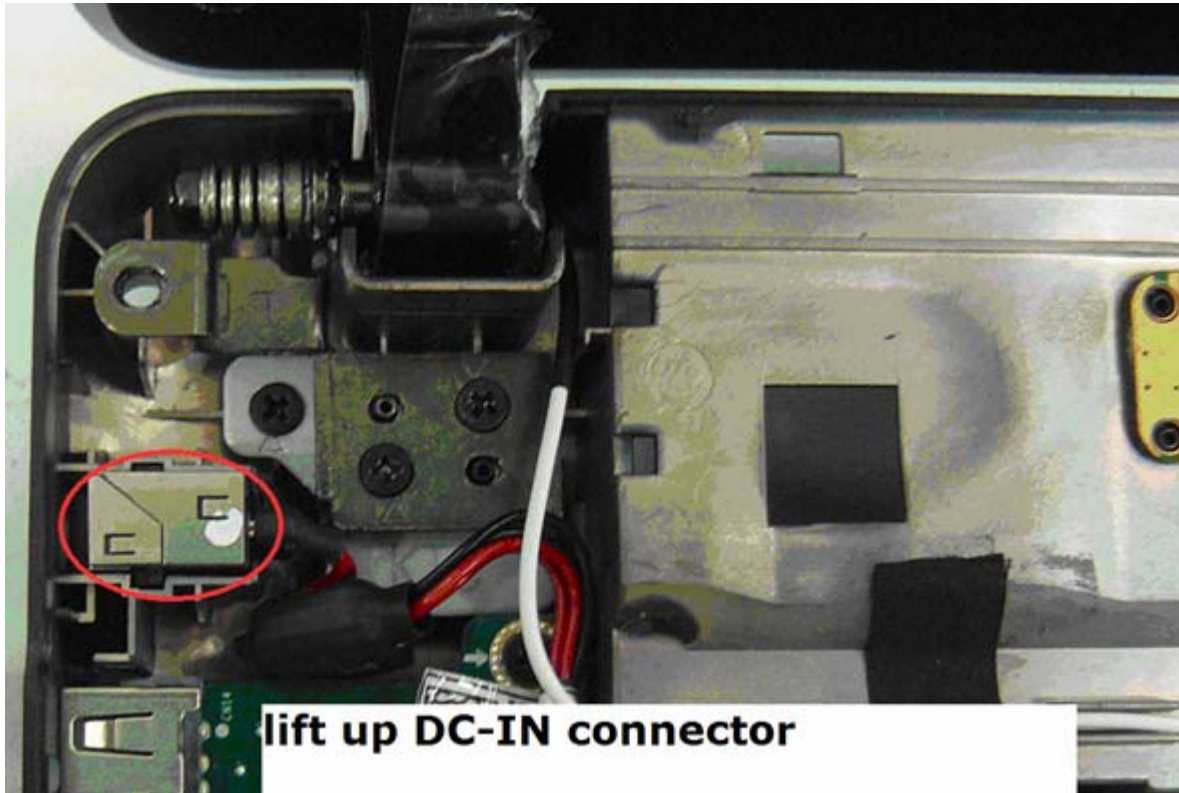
Remove the DC-IN connector from the base assembly
